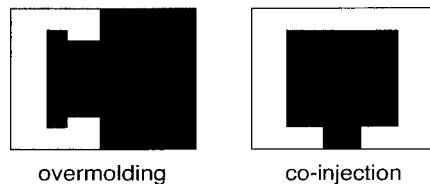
Schematic cross-section of an over molded and co-injection molded two material components.
